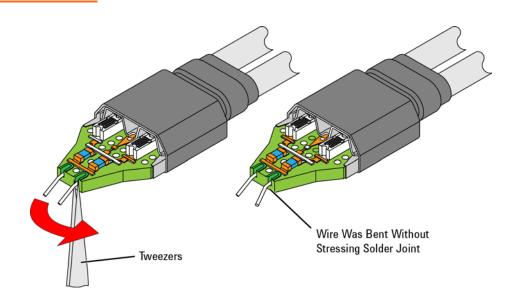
Adjusting Spacing Without Stressing Solder Joint
